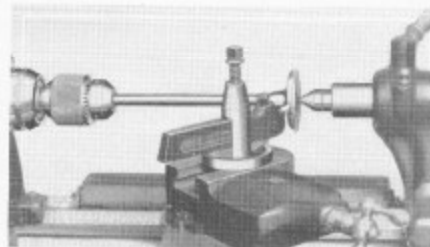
Refacing an exhaust valve by turning in the lathe. Price: 7 Blue Prints, 8 Job Sheets, \$1.85.
